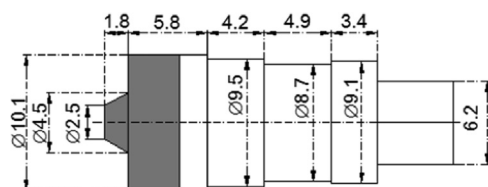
Configuration of the hybrid tools and dimensions of pin and shoulder. The unit is in millimeter. WC–Co material is shown in the dark shade.
